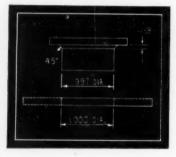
Insert is welded to sheet by ringprojection welding. Details of assembly are shown in drawing at left
